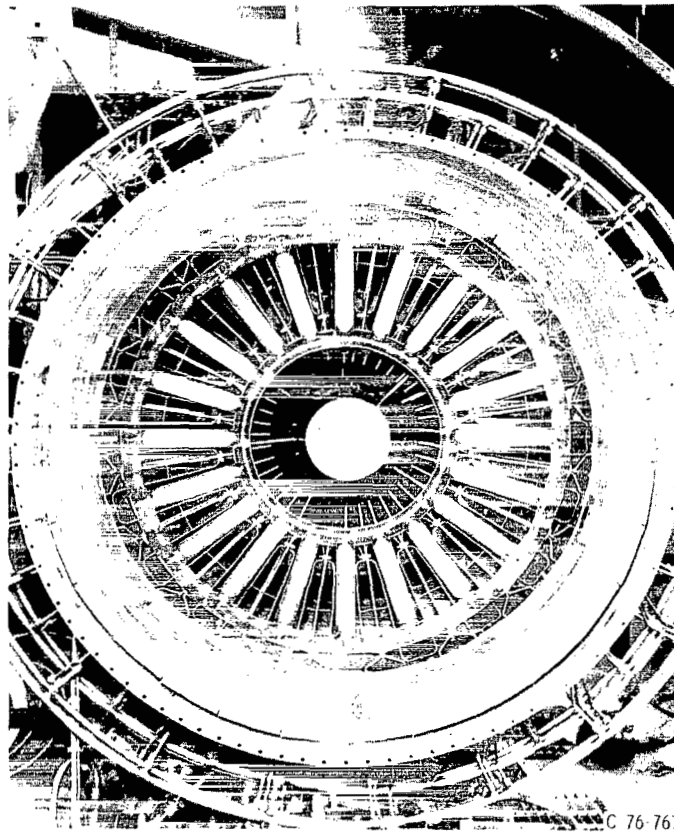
Mixer flameholder viewed from aft showing core and fan chutes and radial fuel bars.
